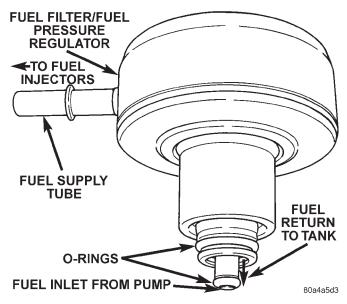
Fuel Filter/Fuel Pressure Regulator
